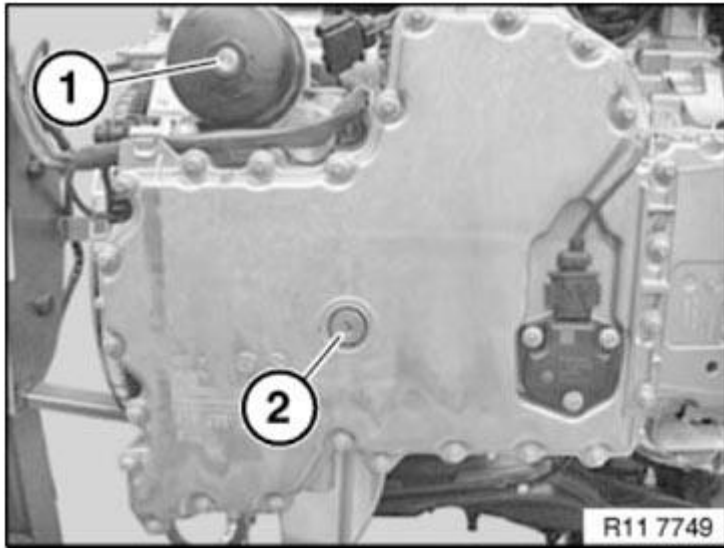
Identifying Screw Plug Of Oil Filter Cap And Oil Sump
